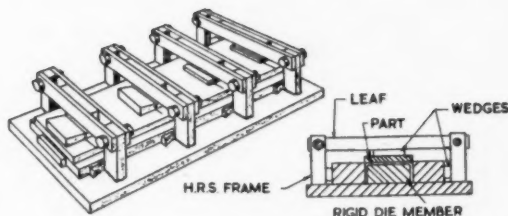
Hot straightening fixture for airframe parts formed from titanium alloy sheets
